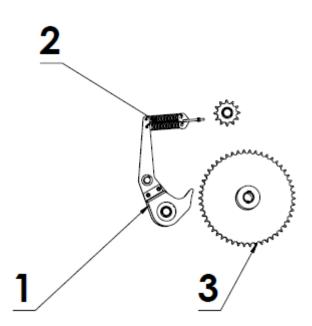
Adapter's drive along with components 1 – tensioner; 2 – tensioning springs; 3 – chain wheel
